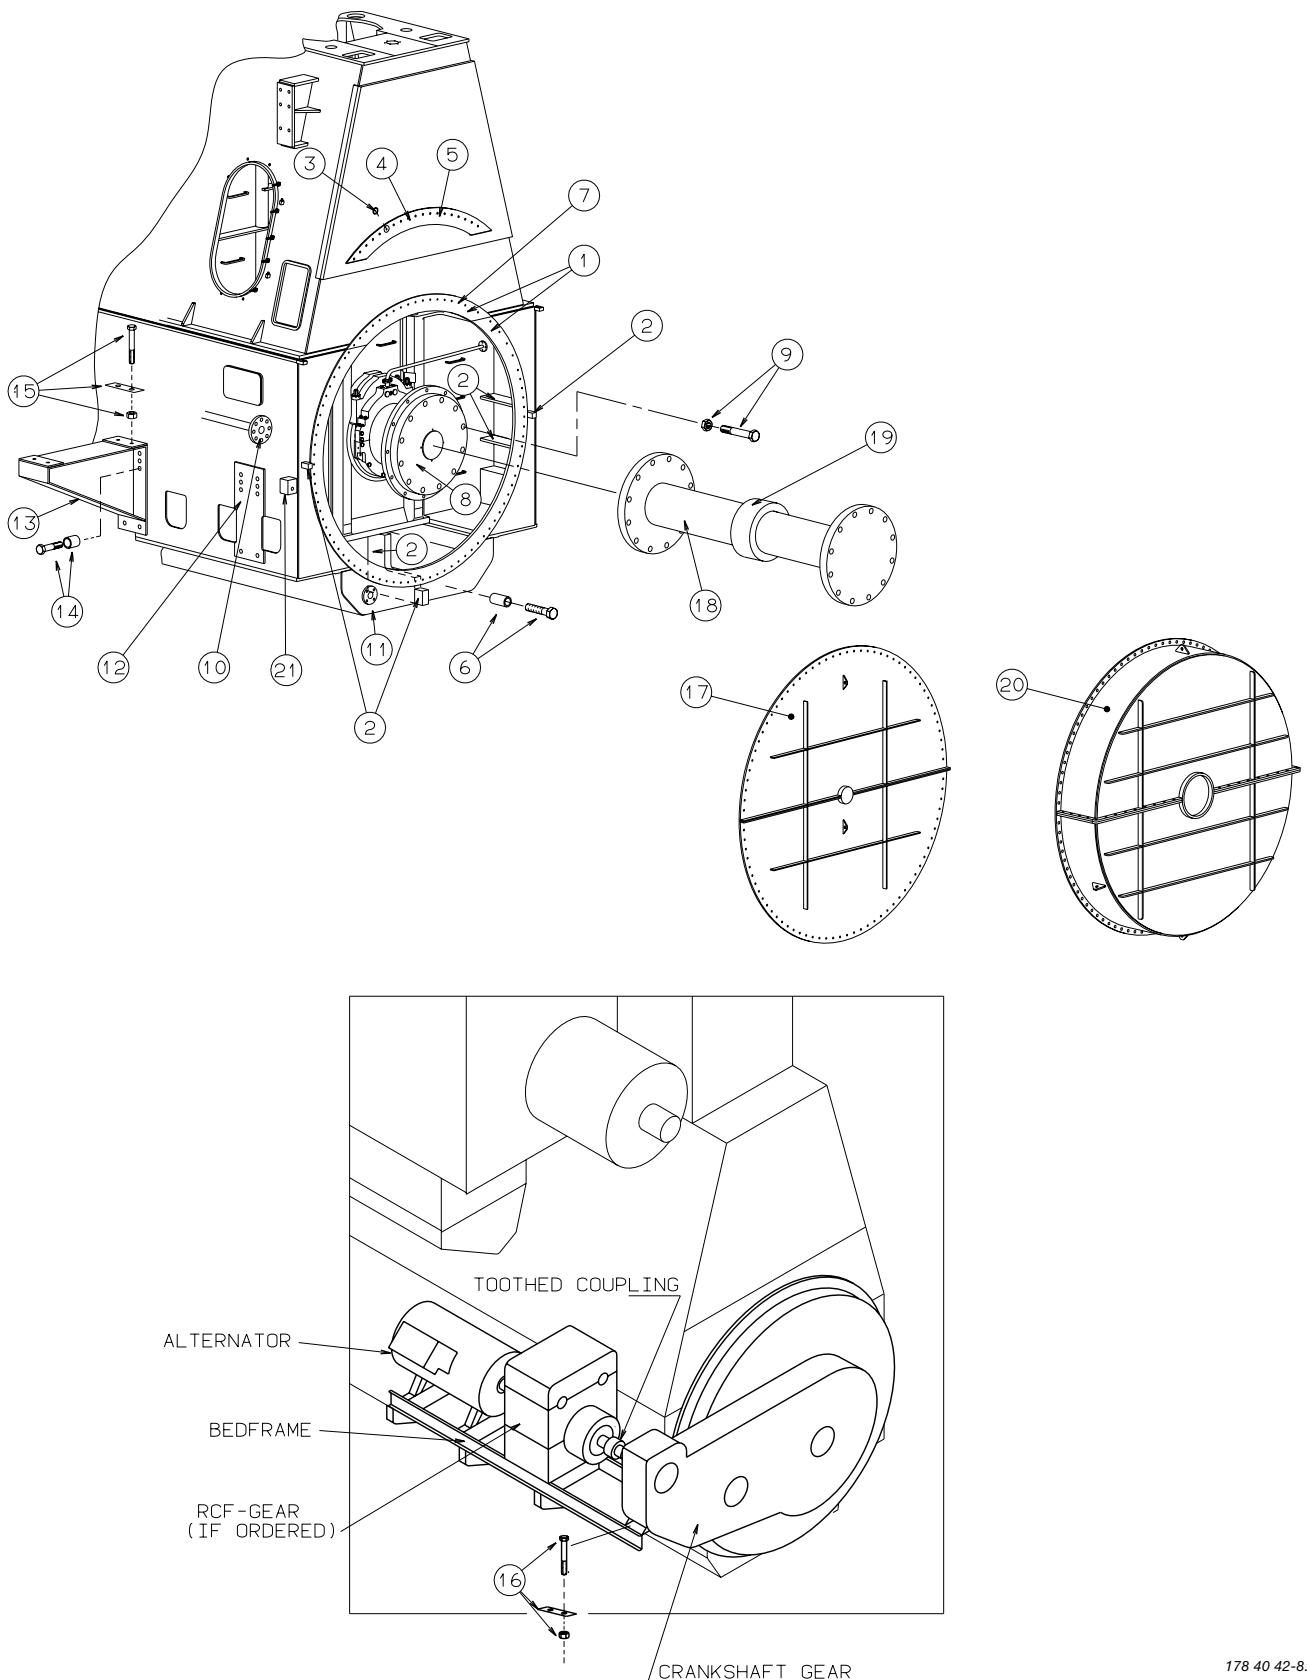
Necessary preparations to be made on engine for mounting PTO. (To be decided when ordering the engine)
